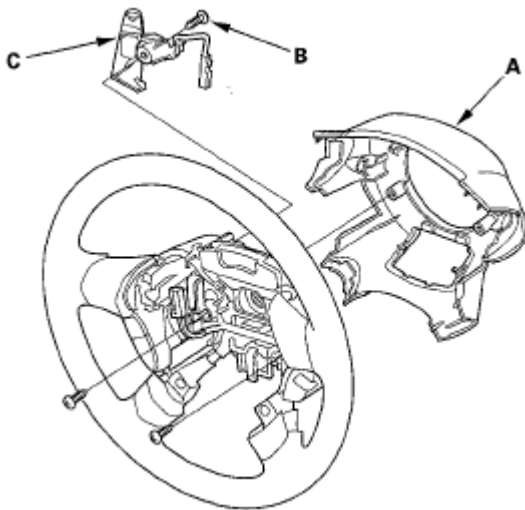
Identifying Steering Wheel Rear Cover And Paddle Shifter
